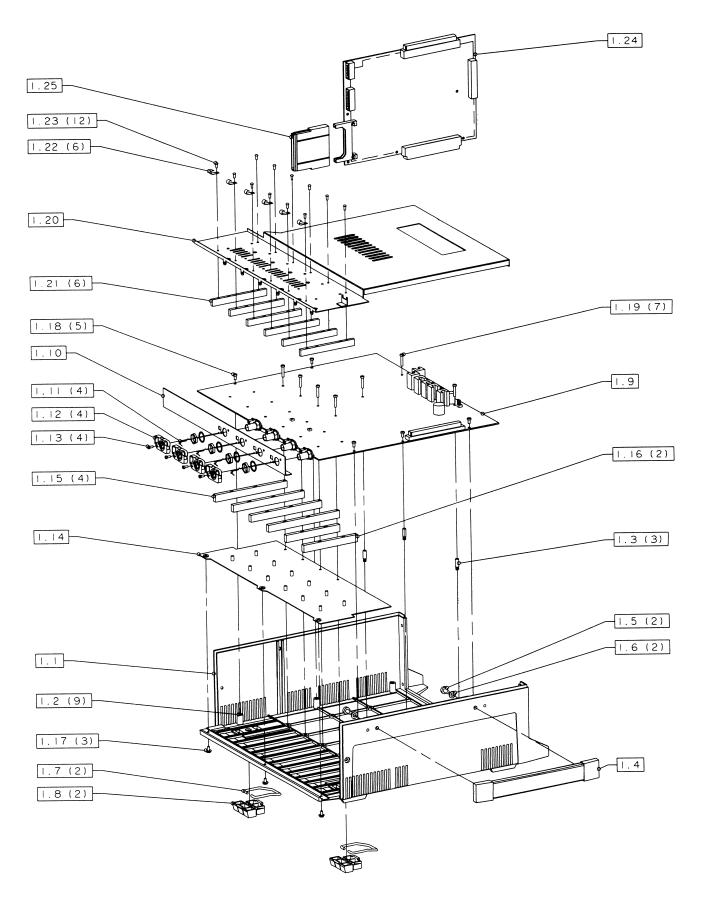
9320 LOWER COVER EXPLODED VIEW
